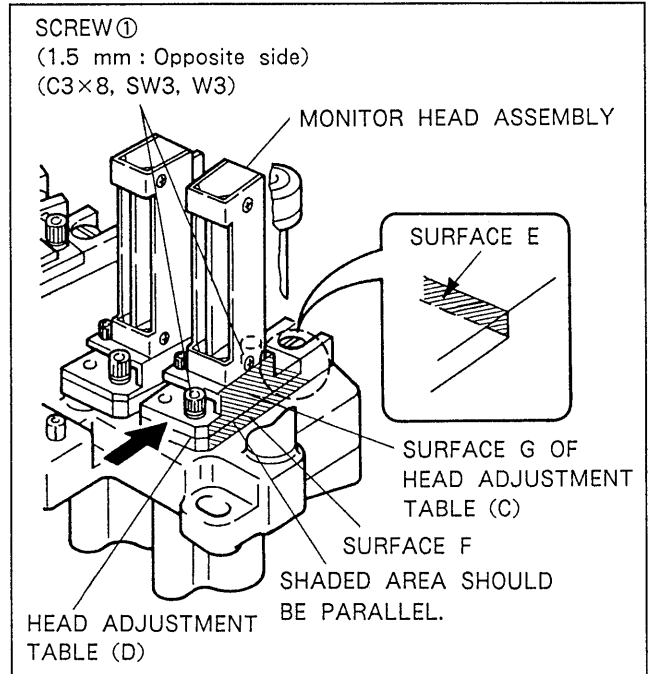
Monitor Head Ass'y Mounting Position Adjustment
